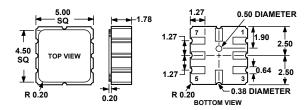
8-Terminal Ceramic Leadless Chip Carrier [CLCC] (E-8) Dimensions shown in millimeters
